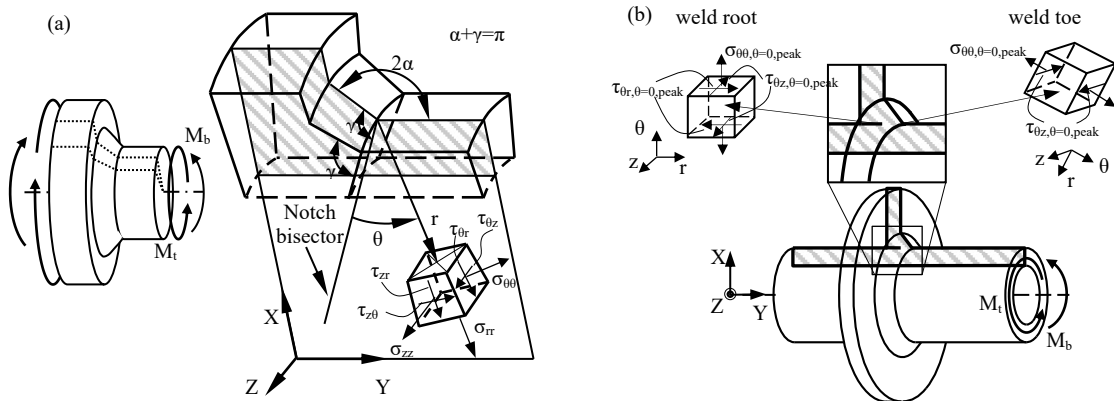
(a) Polar reference system centred at the weld toe of a typical tube-to-flange welded joint geometry subjected to multiaxial bending and torsion loading. (b) Sharp V-shaped notches in a welded joint at the weld root ( $2\alpha=0^\circ$ ) and at the weld toe ( $2\alpha$  typically equal to  $135^\circ$ ). Definition of peak stresses  $\sigma_{\theta\theta, \theta=0, \text{peak}}$ ,  $\tau_{r\theta, \theta=0, \text{peak}}$  and  $\tau_{\theta z, \theta=0, \text{peak}}$ .
